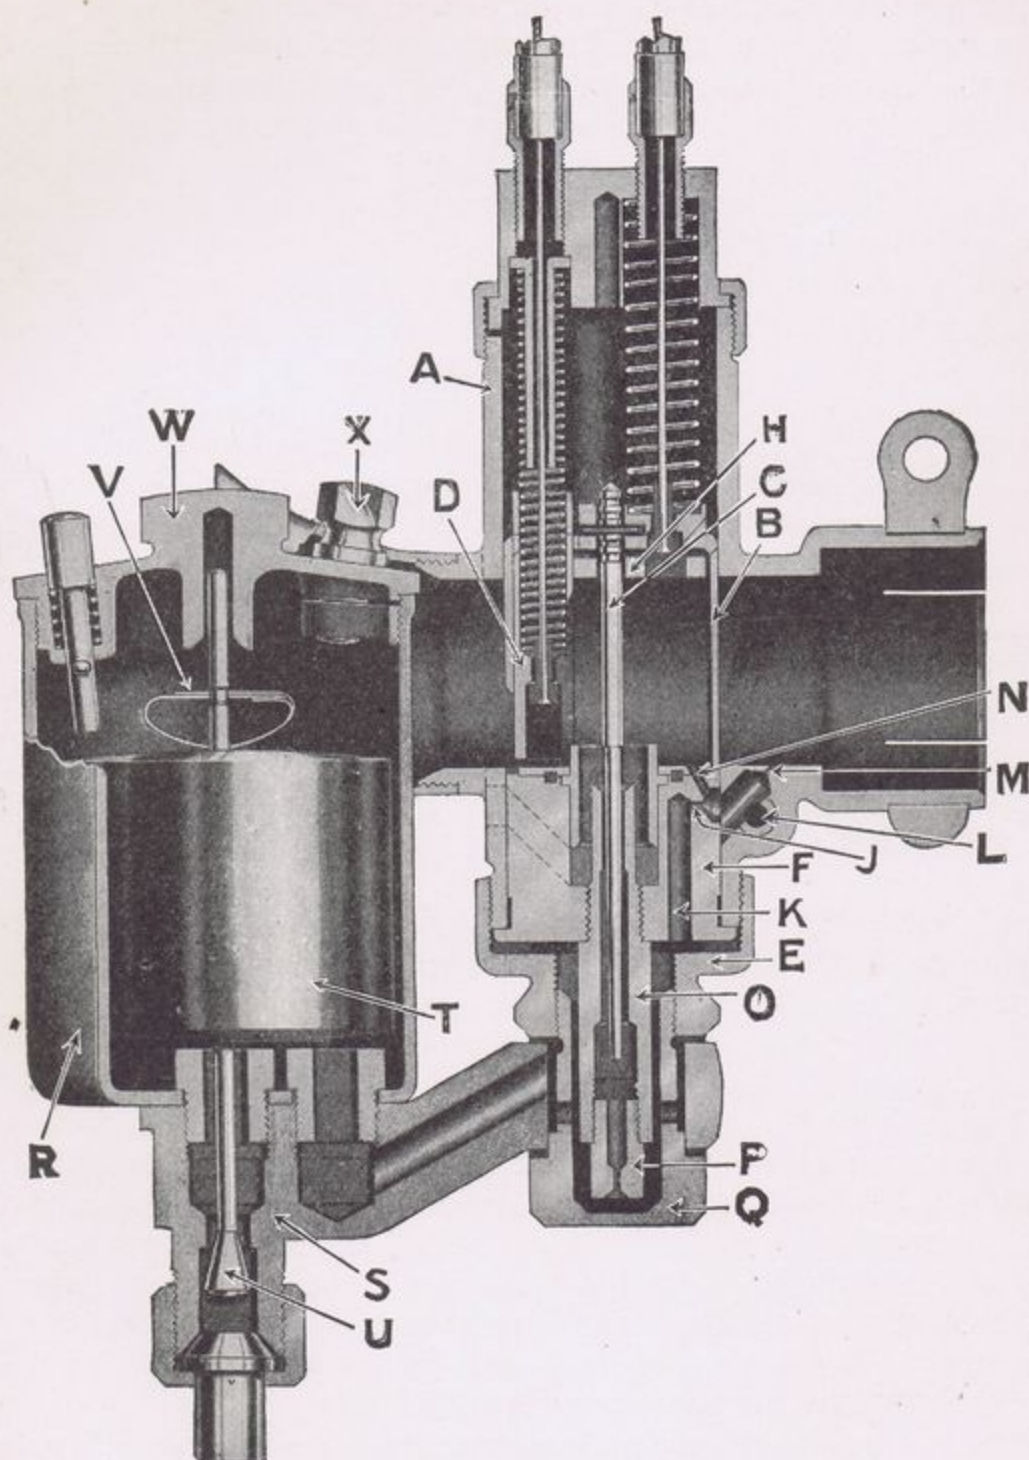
SECTIONAL VIEW OF STANDARD AMAL CARBURETTOR
